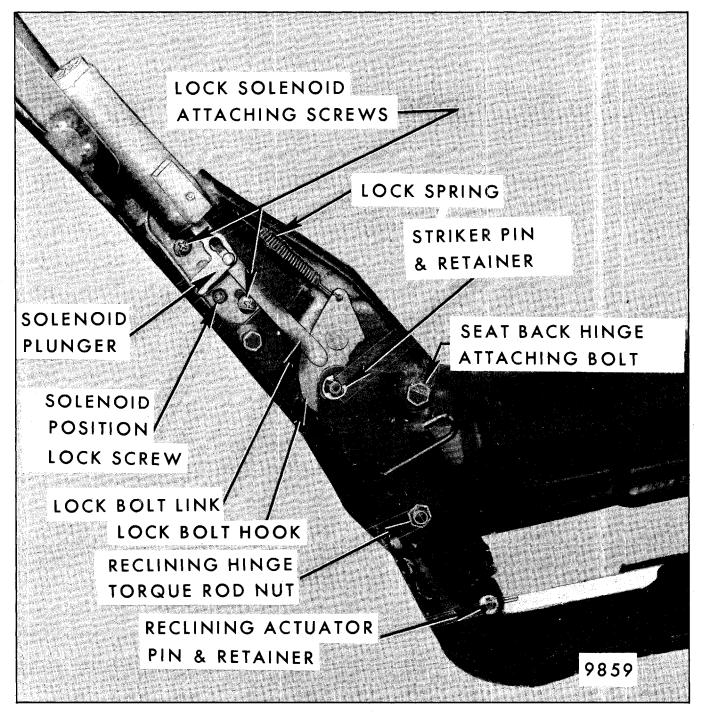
50-50 Front Seat With Reclining Back and Electric Seat Back Lock - Cadillac Eldorado
